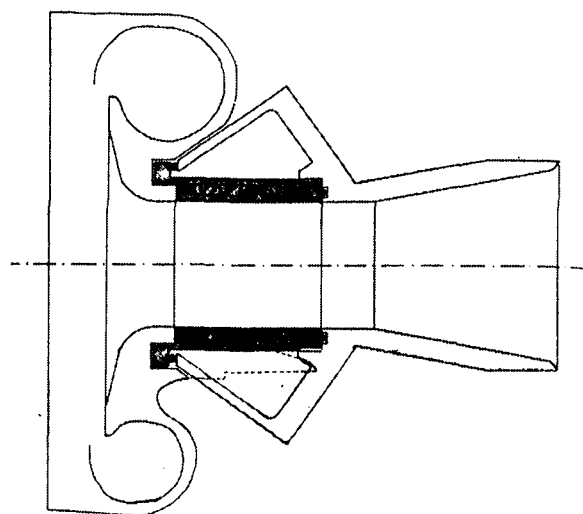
Inlet casing adaptor and nozzle ring assembly
